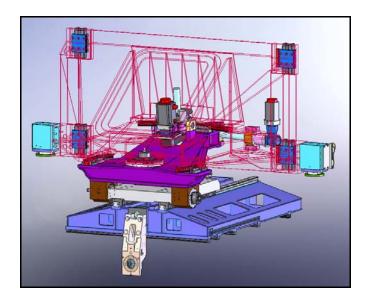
Skin side Y-A-B-U assembly, process tools not shown.
